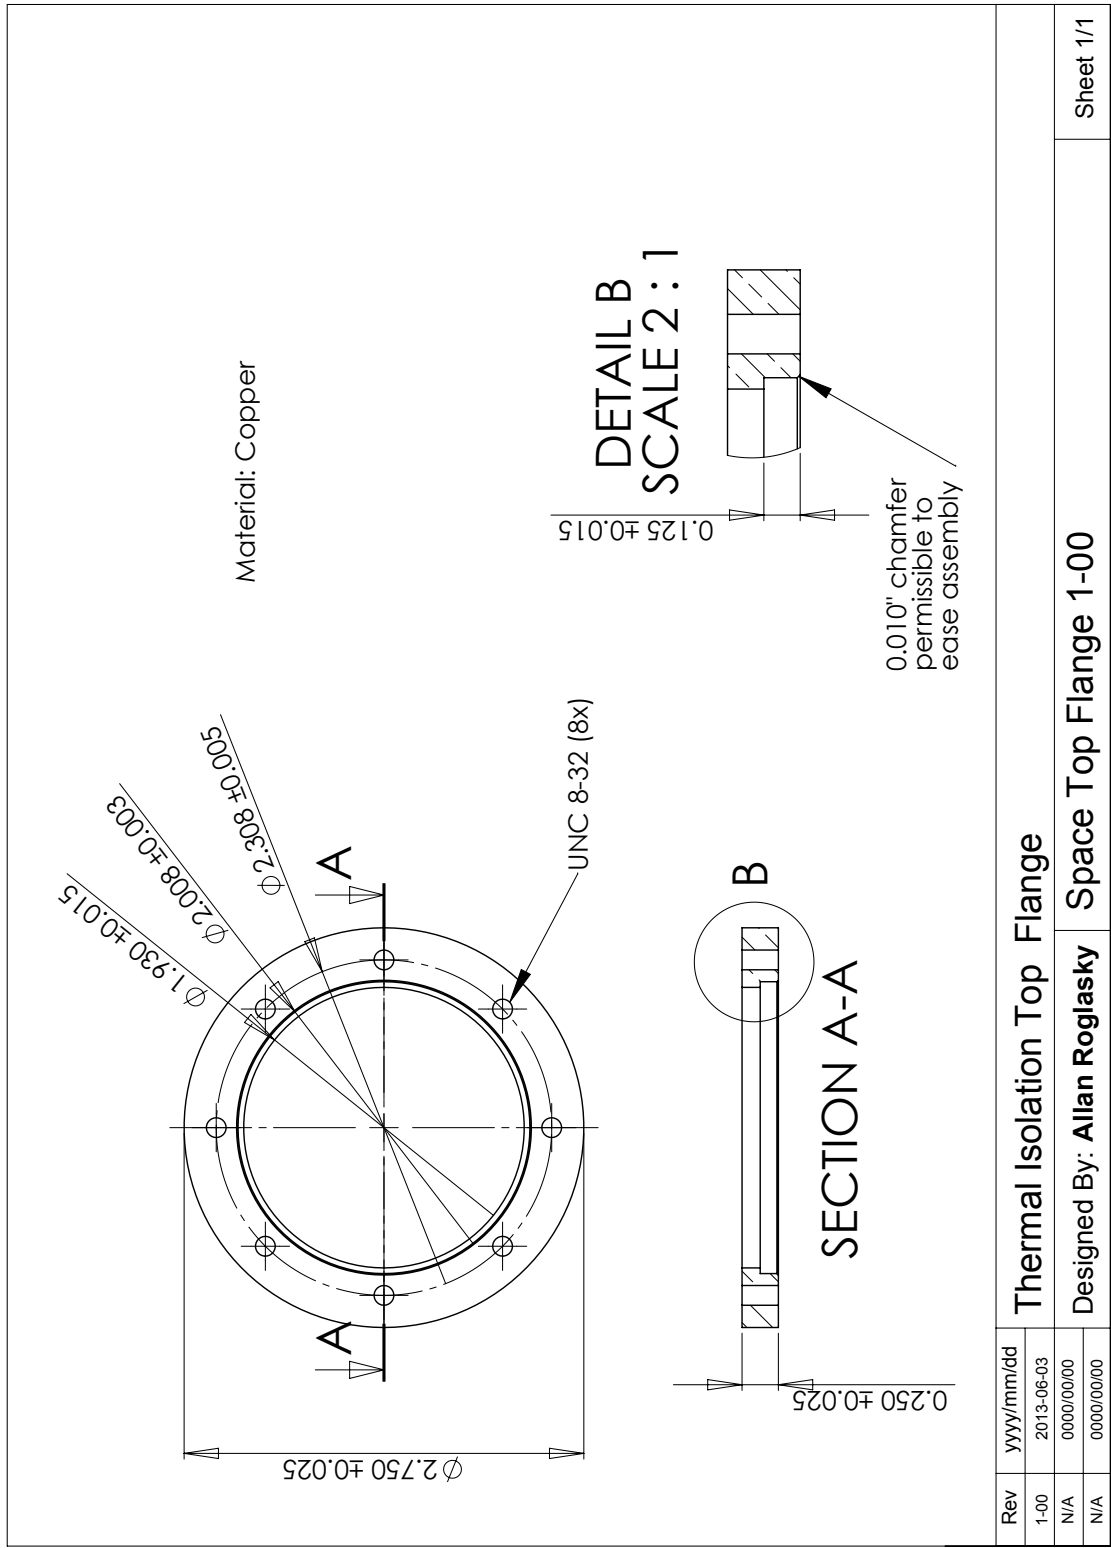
Thermal Isolation Spacer Assembly / Top Flange
